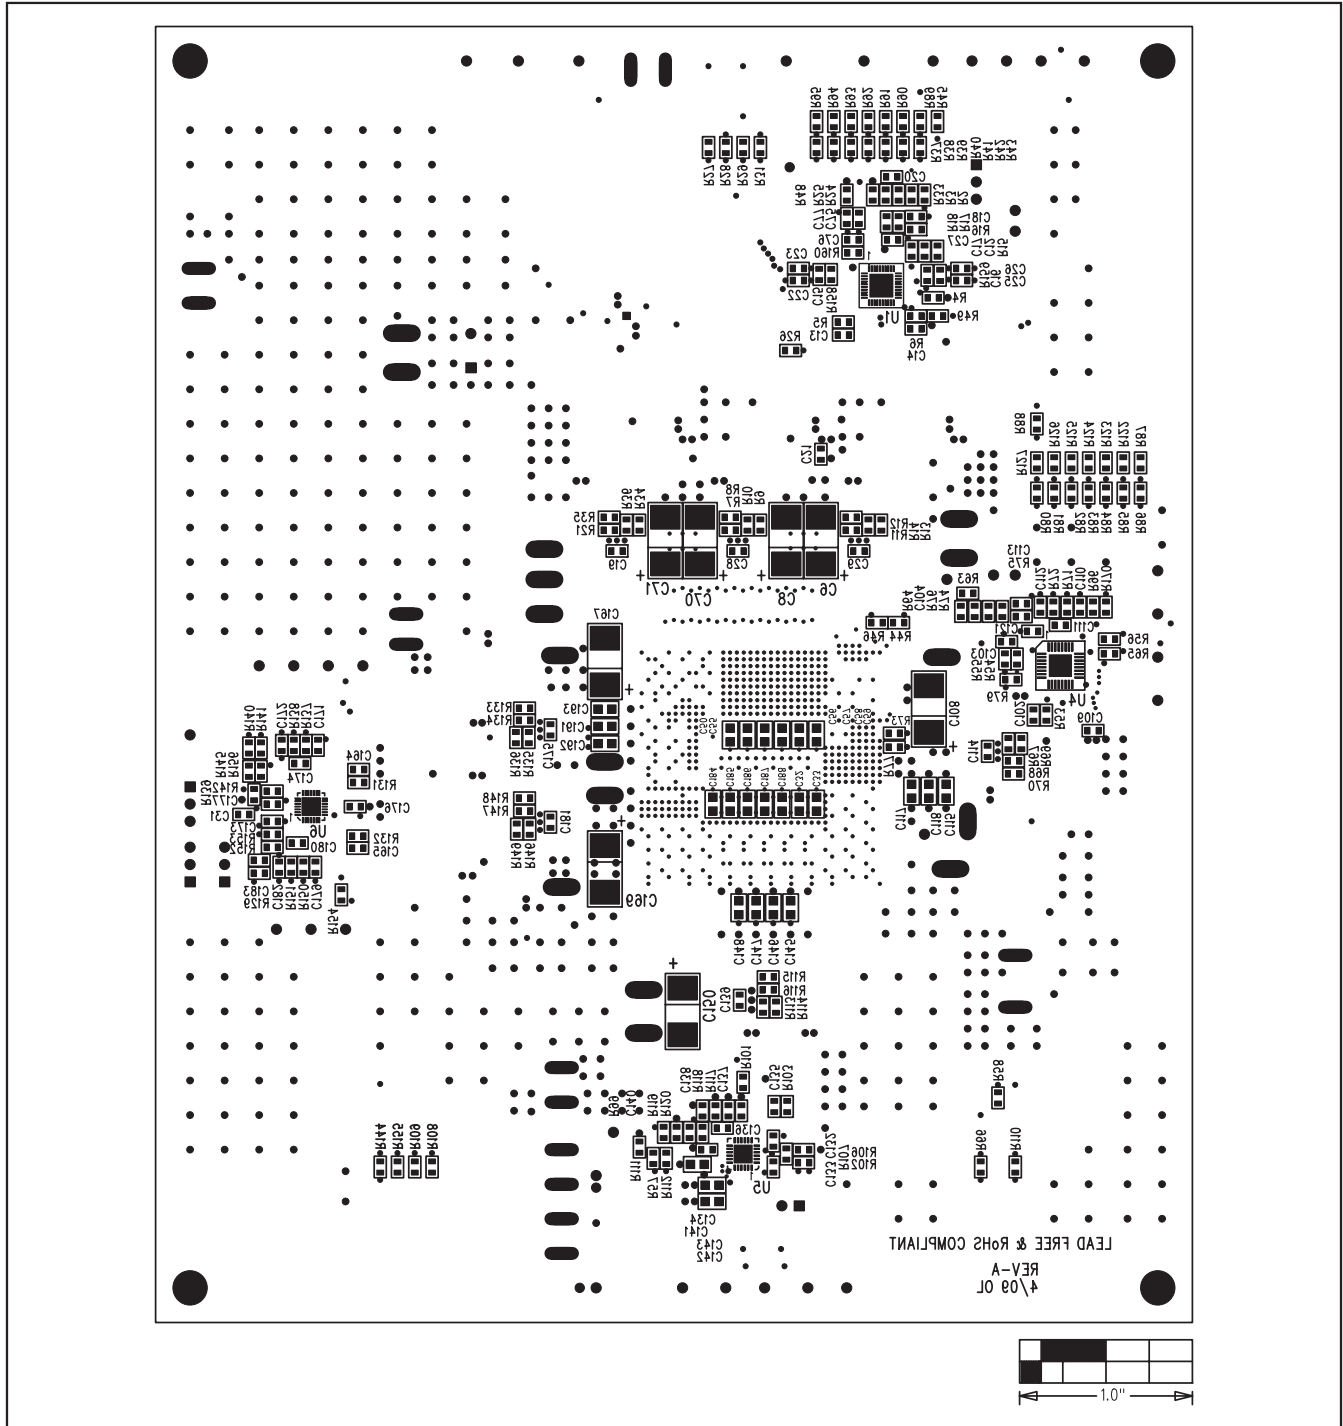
MAX17030 EV Kit Component Placement Guide—Solder Side
